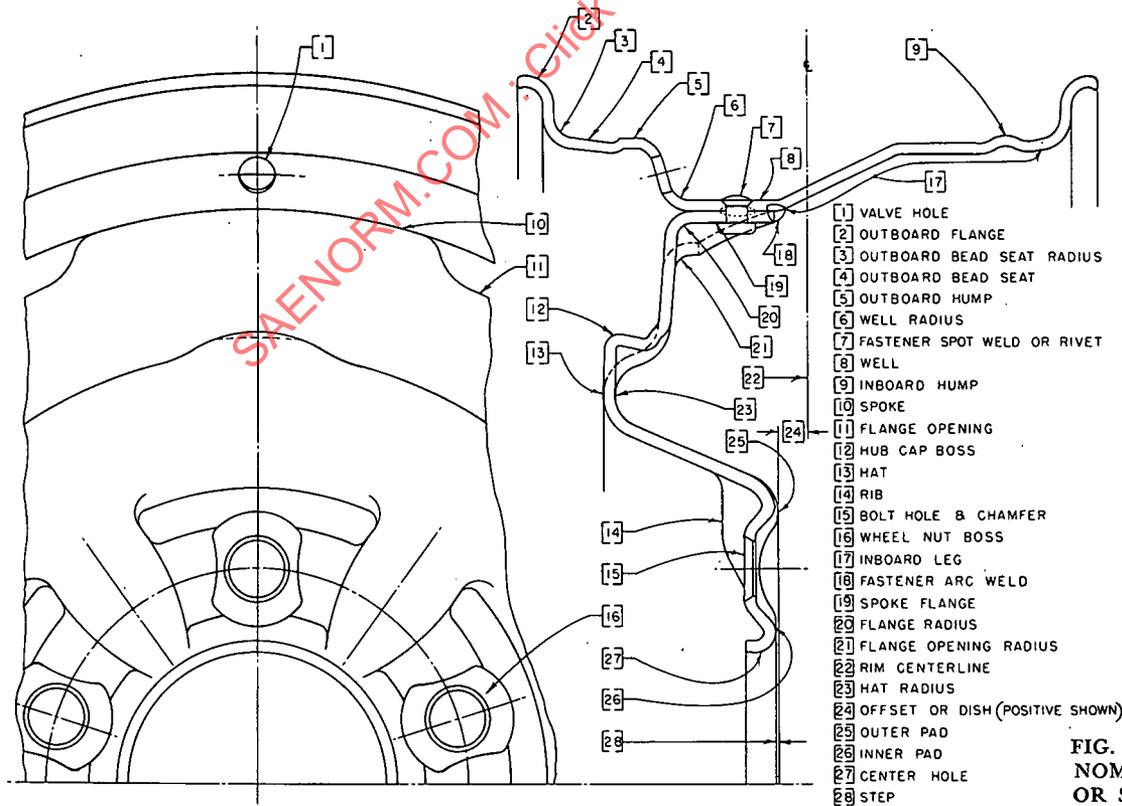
PASSENGER CAR WHEEL NOMENCLATURE (RIM AND DISC OR SPIDER ASSEMBLY)
